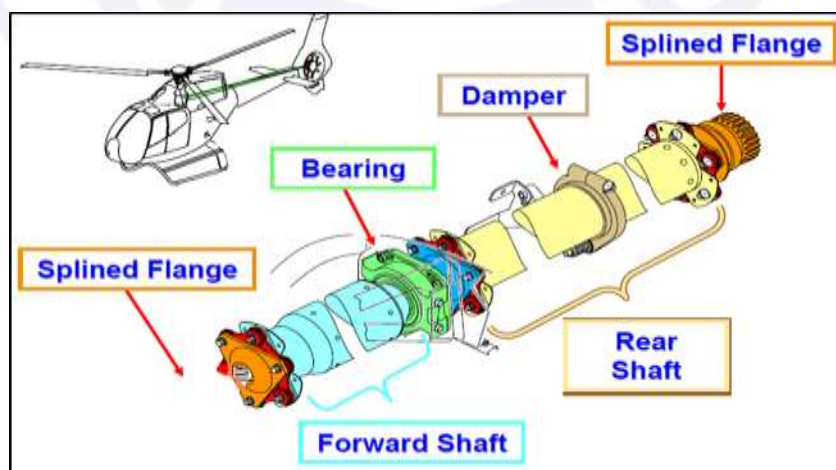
Picture of the Tail Rotor Drive Shaft.
